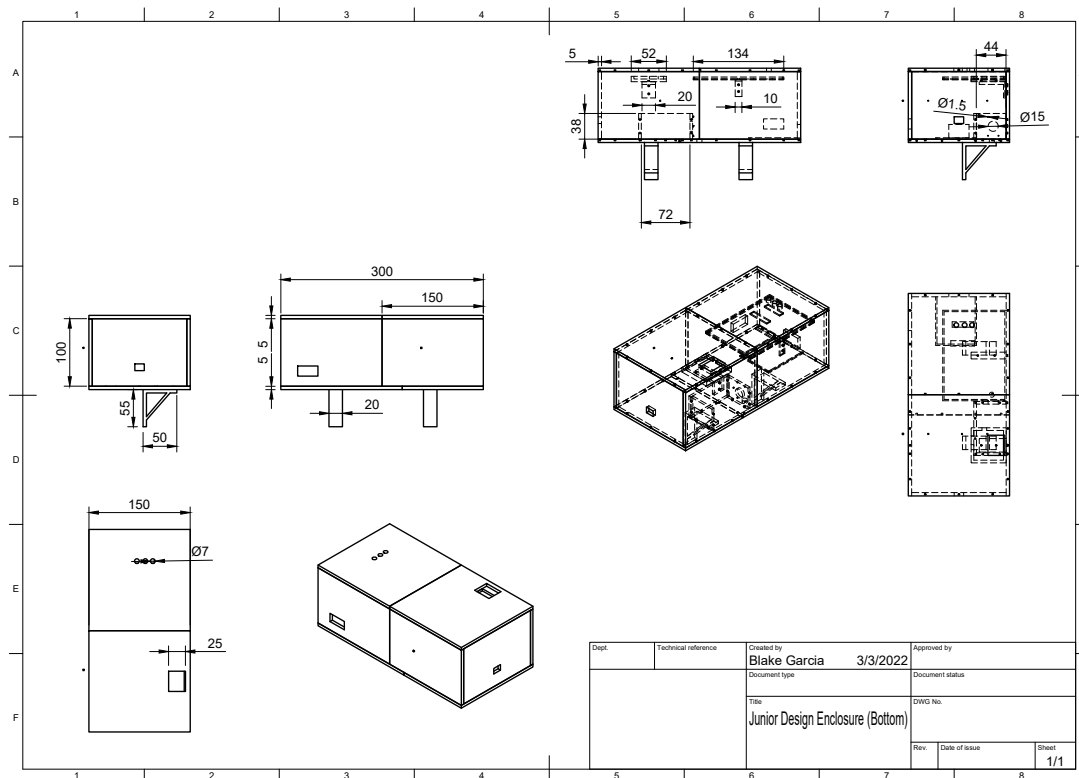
This is a layout with top, front, side, and isometric views of the electronics enclosure. Relevant dimensions are annotated.
